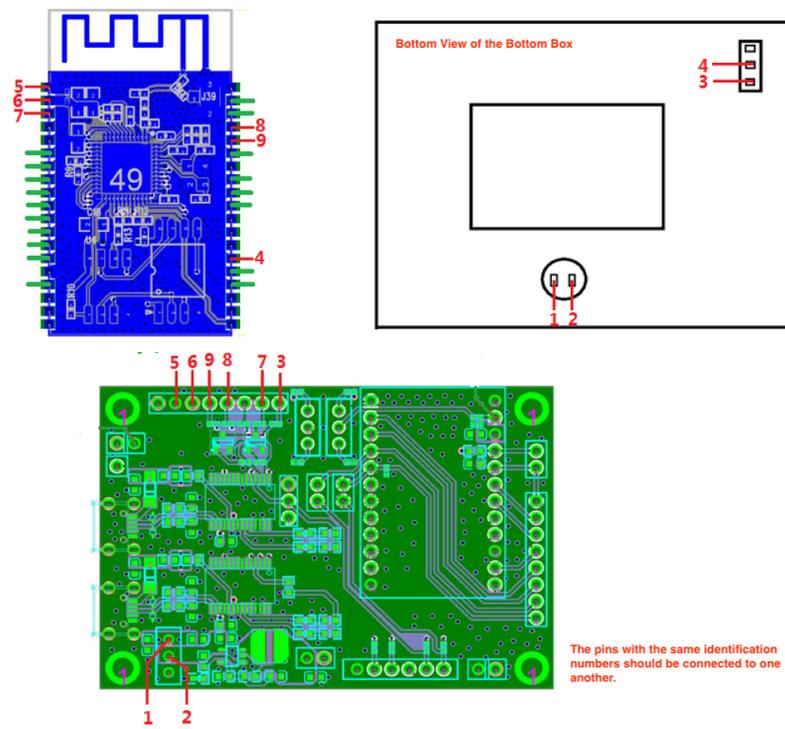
The Wiring of the ESP-WROVER Fixture
